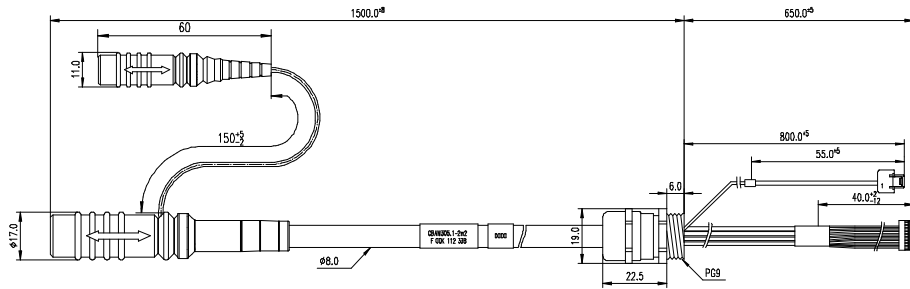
CBAM305.1-2m2 Cable - Dimensions
